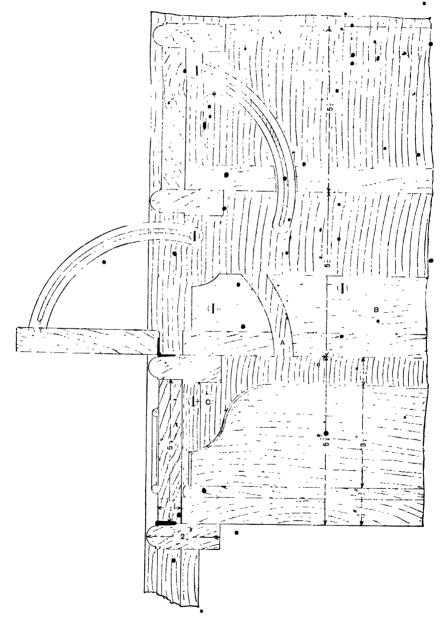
View showing Details of Music Cabinet Flaps.
